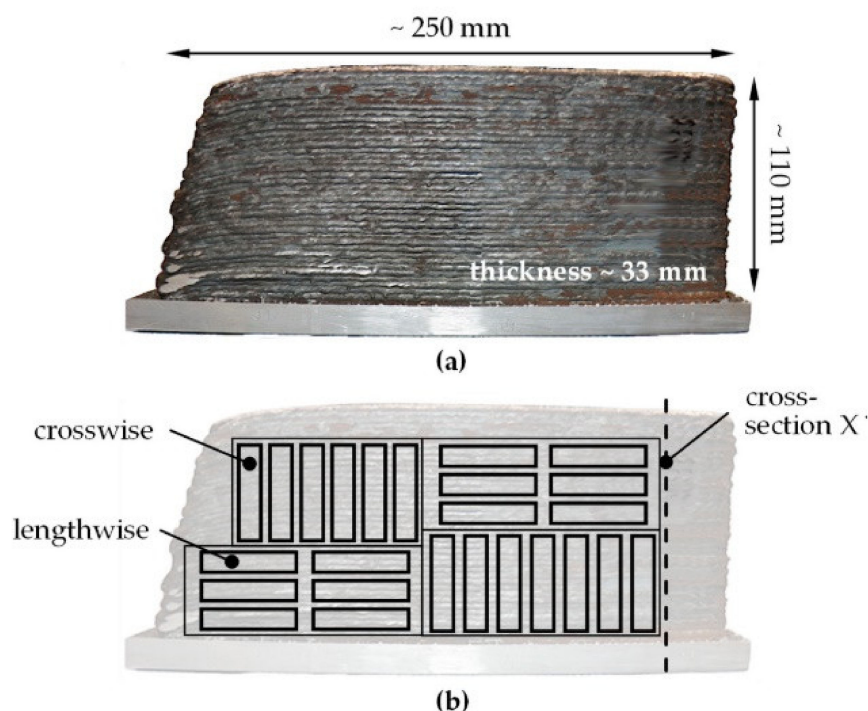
Wire arc additive manufacturing (WAAM) material: (a) semi-finished block products, (b) sampling plan for tensile specimens with directional designation related to the weld layers [189].
